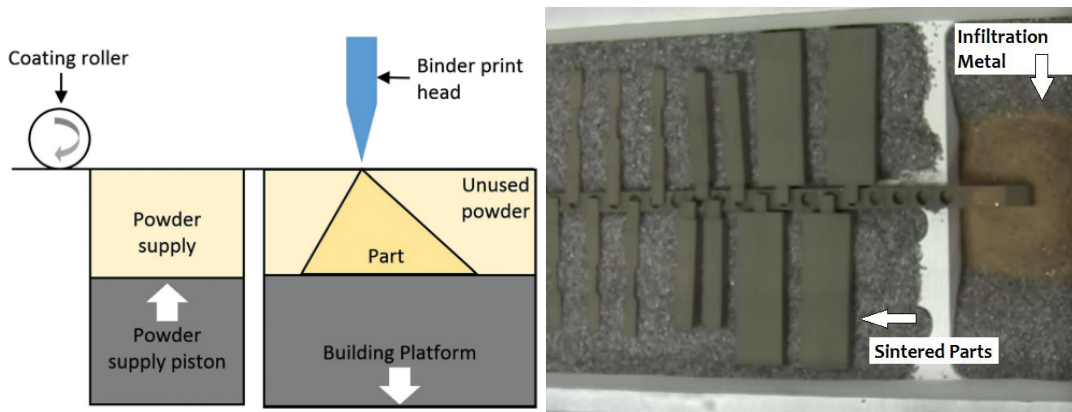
Diagram of the binder jetting process, an image of the sintered part metal infiltration layout [93] [74].
